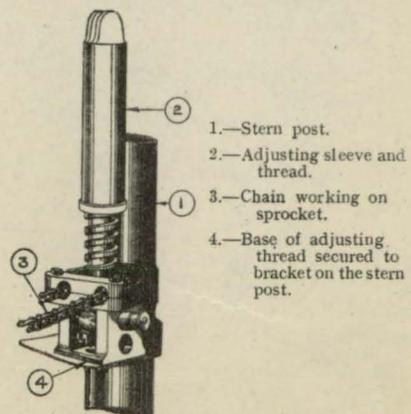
Attachment of base of stabilizer adjusting gear to stern post.
